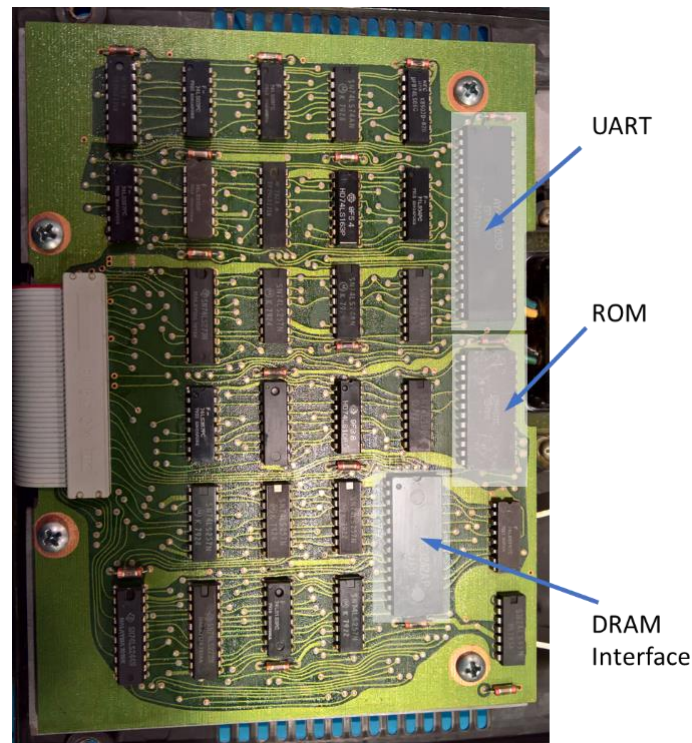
Jerrold PlayCable Upper PCB Major Components
